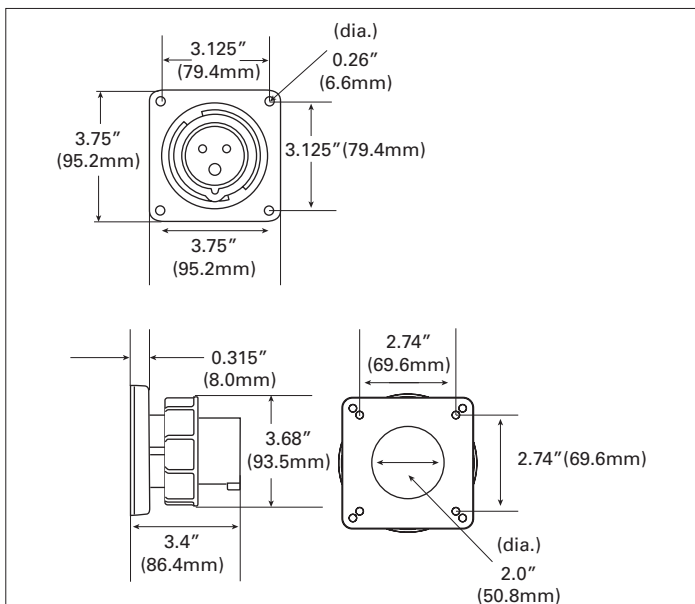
30A & 32A 2-P, 3-W & 3-P, 4, Front, Side & Back View Inlets
